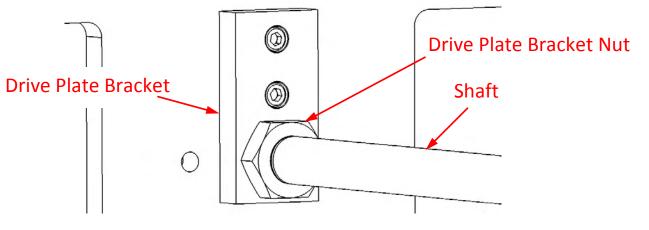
Drive Plate Mount for C01-000061-000 and C01-000222-000
